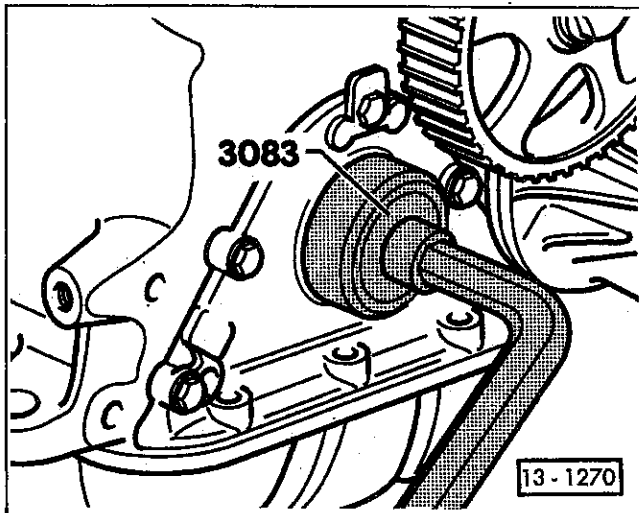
Front crankshaft oil seal being installed using Volkswagen special tool no. 3083.
